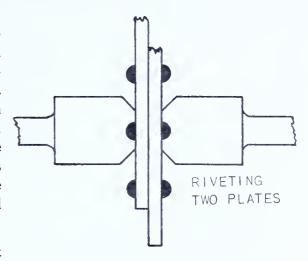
Enlarged View of Dies Shown in Fig. 165
